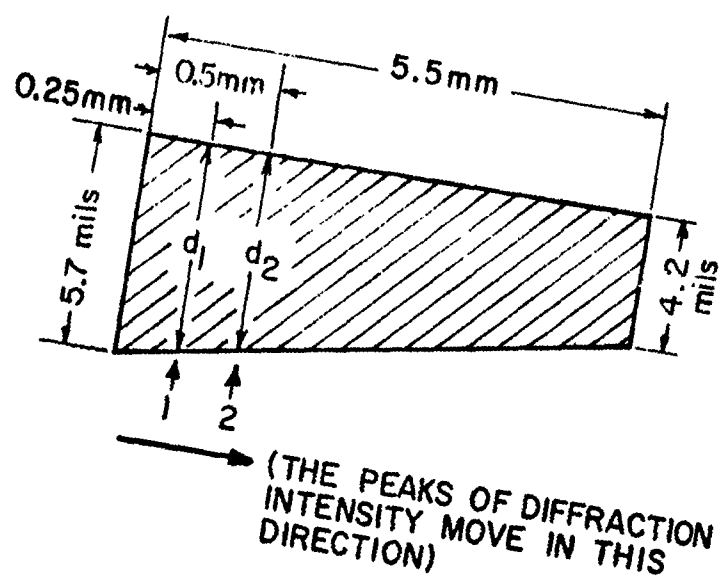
Dimensions of the wedge-shaped transducer.
